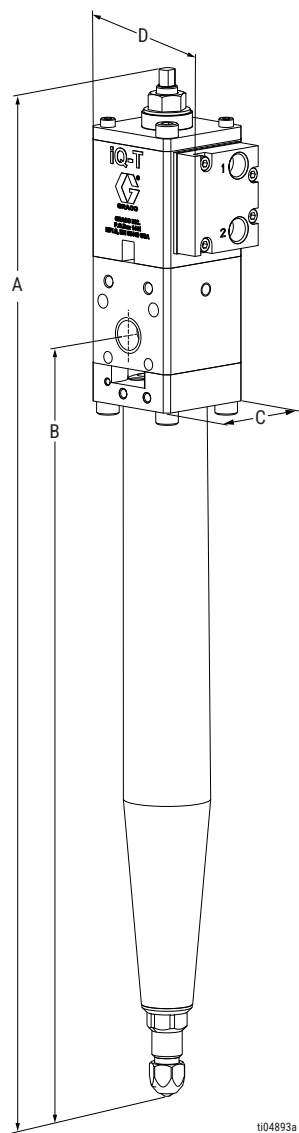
Dimensions for Tip Seal PSM PN 2012490
